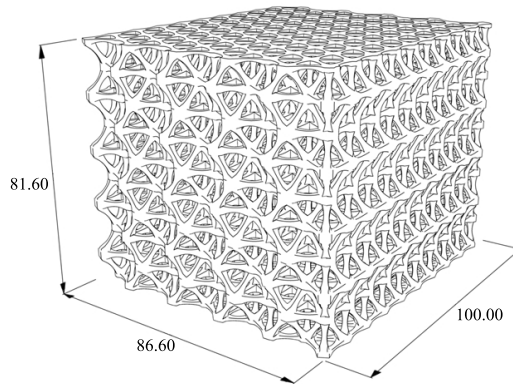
Lattice geometry containing small square cross sectional beam elements; Dimensions in [mm]
